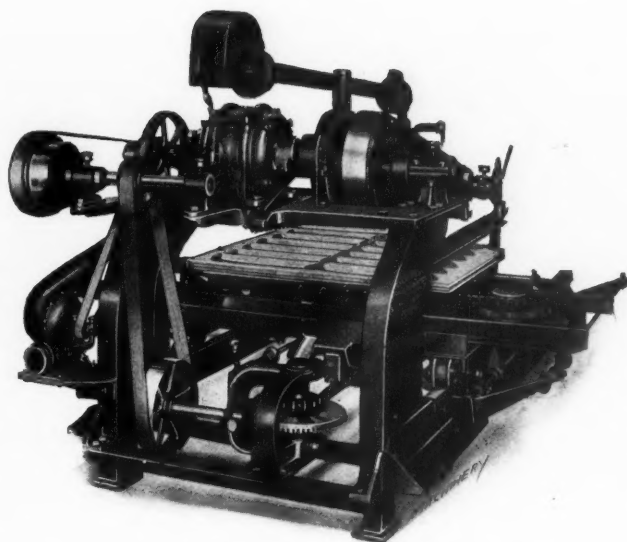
End View of Machine showing Arrangement of Drive to Feed Mechanism and Exhaust Fan
